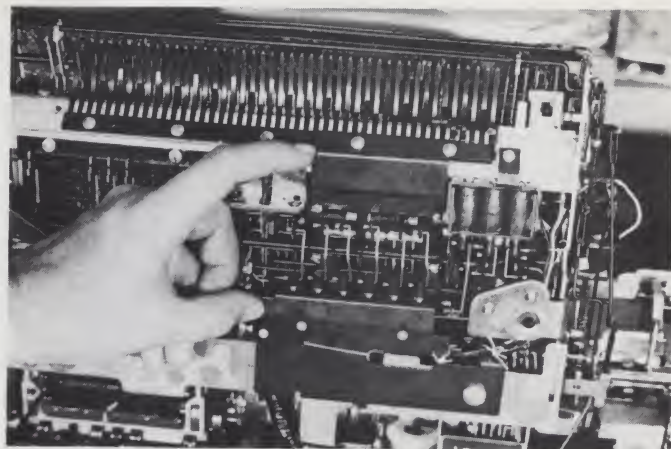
Existing screw holes are used to mount the solenoid assembly seen between my thumb and index finger.
